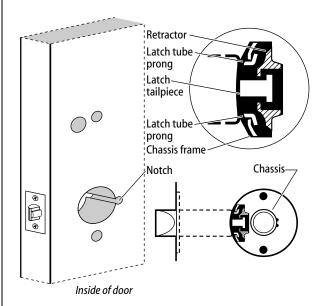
Installing the lock chassis and engaging the retractor in the latch
